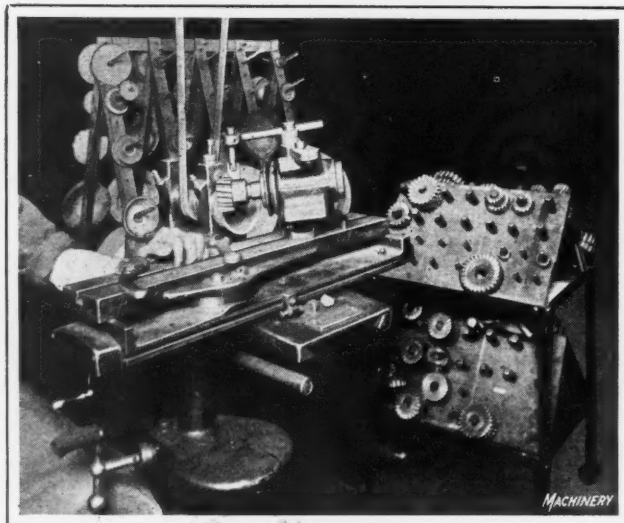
Chamfering the Cutting Edges of an End-mill on a Cutter Grinding Machine
